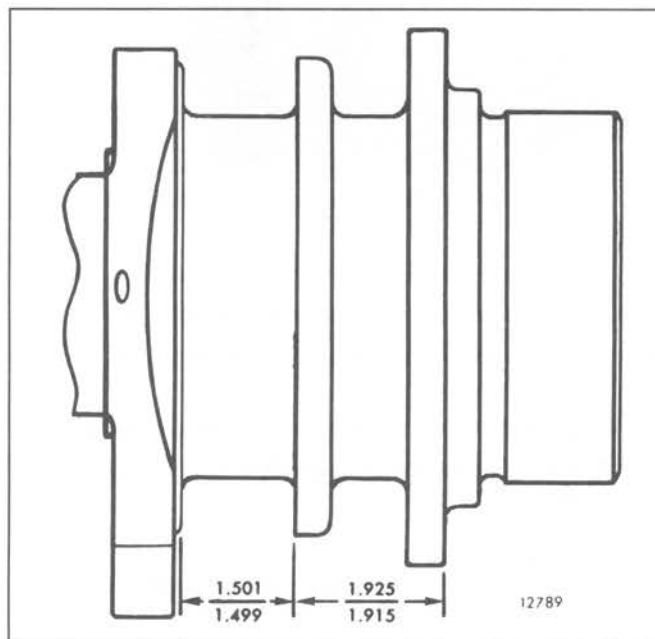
Standard Dimension at Rear Main Bearing Thrust Washers
